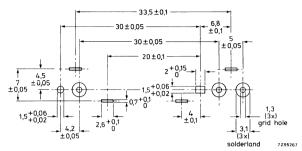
Hole pattern in the printed-wiring board, viewed from the component side. The 4 oblong holes 2.6×0.7 are required for the accomodation of the p.w. tags of the tin plated shield, see Fig. 3.
